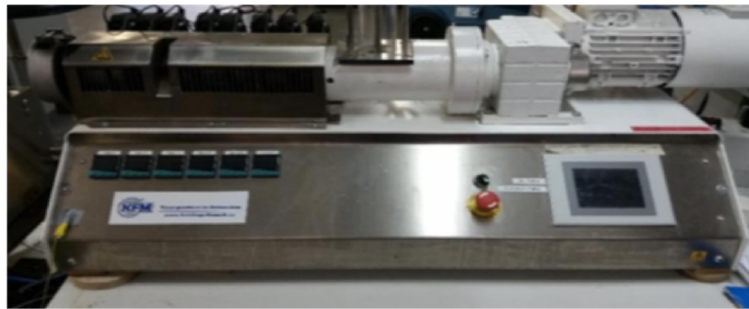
Sample of extrusion machine during the preparation of the specimens.
